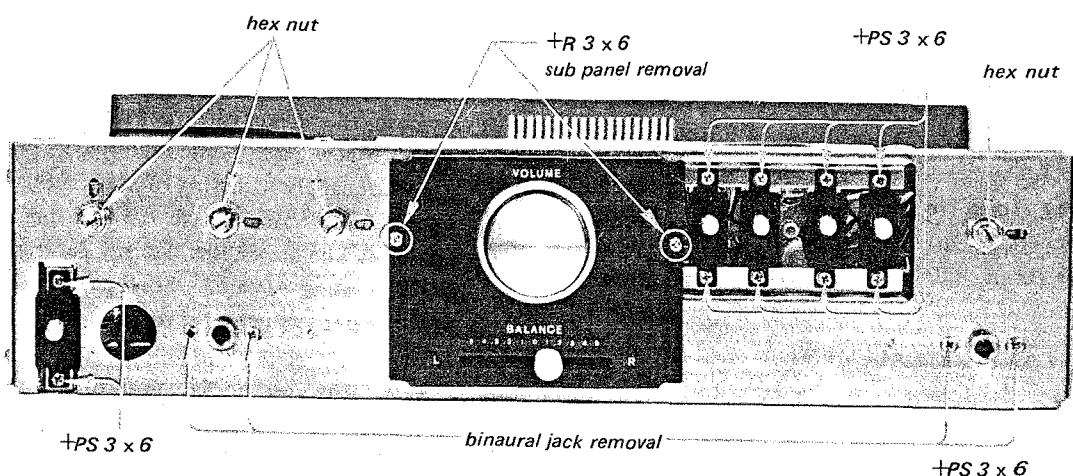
Front sub panel, switch, control and binaural jack replacement
